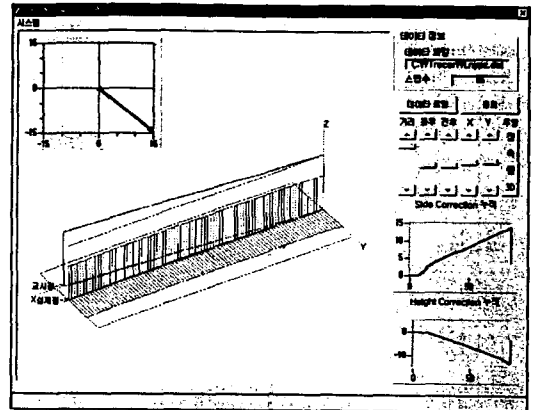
Welding torch trace of weaving center for seam tracking
